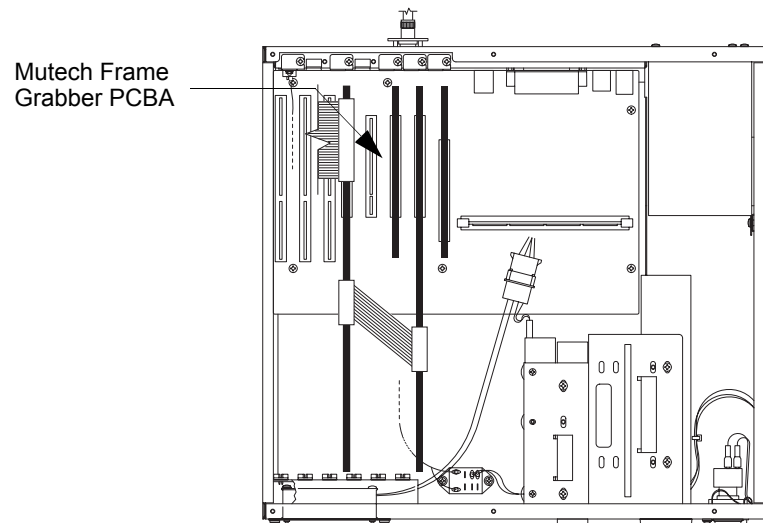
Location of the Mutech Frame Grabber PCBA
